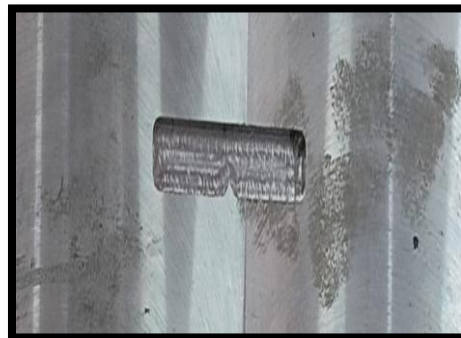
Impact Specimen Mould According to ASTM E-23 Standards.
